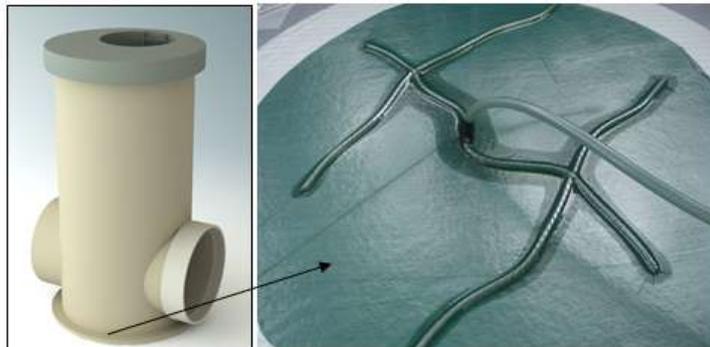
Base Plate (part of Shaft) manufactured with BIO-UPR by vacuum infusion
